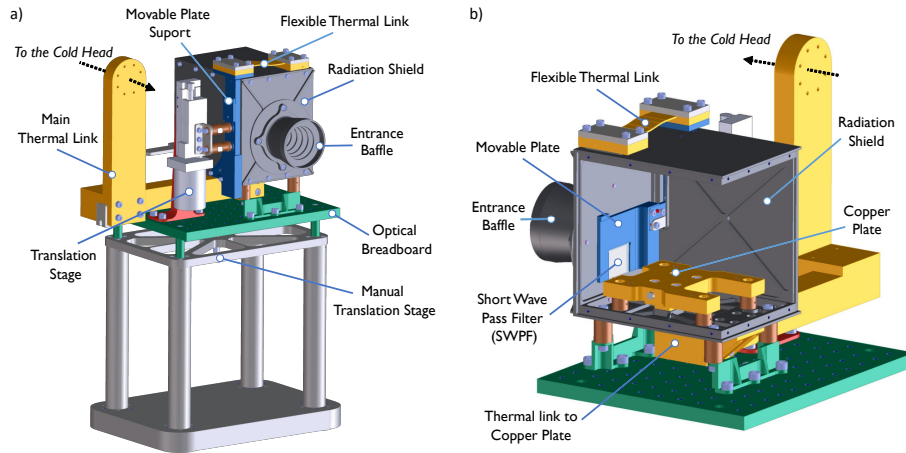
Mount developed to support and thermalize VIS-NIR detectors: a) Frontal view, b) internal view of the radiation shield.
